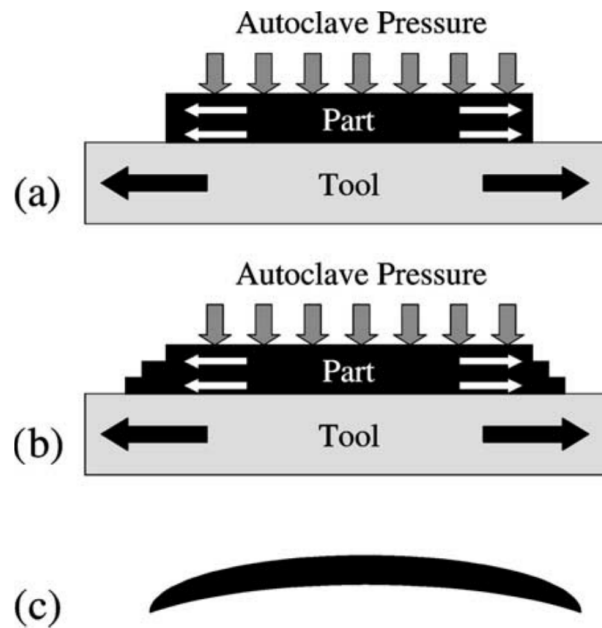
Sketch of warpage mechanism due to tool-part interaction [6].
